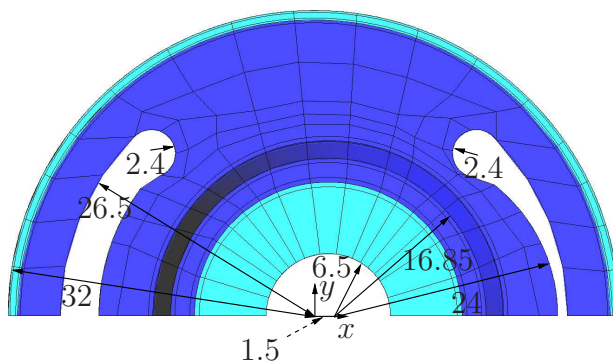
Dimensioning of bearing in  $x$ - $y$ -plane (540 elements)
